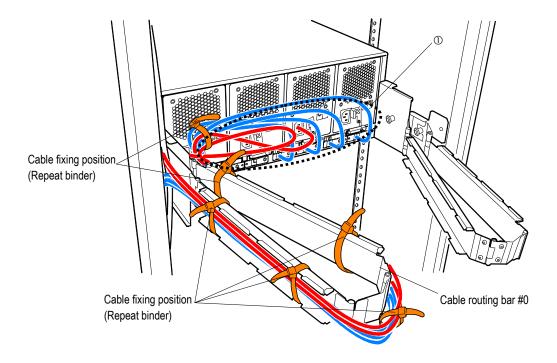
Fixing the ENC Cable #A0, #A1 and Power Cable #B0, #A0 (for Rev.A)
